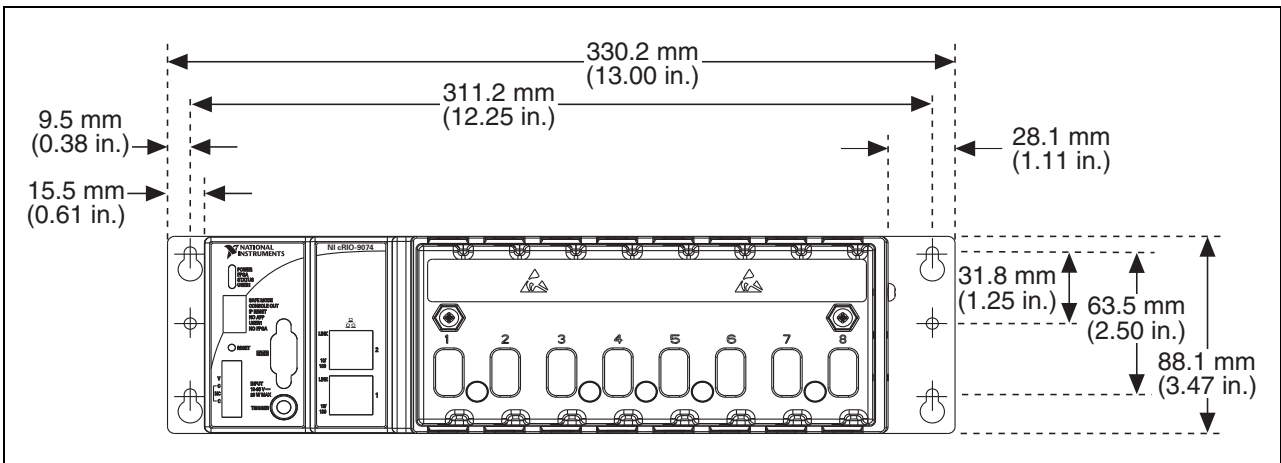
Dimensions of cRIO-9072/3/4 with Panel Mount Accessory Installed
